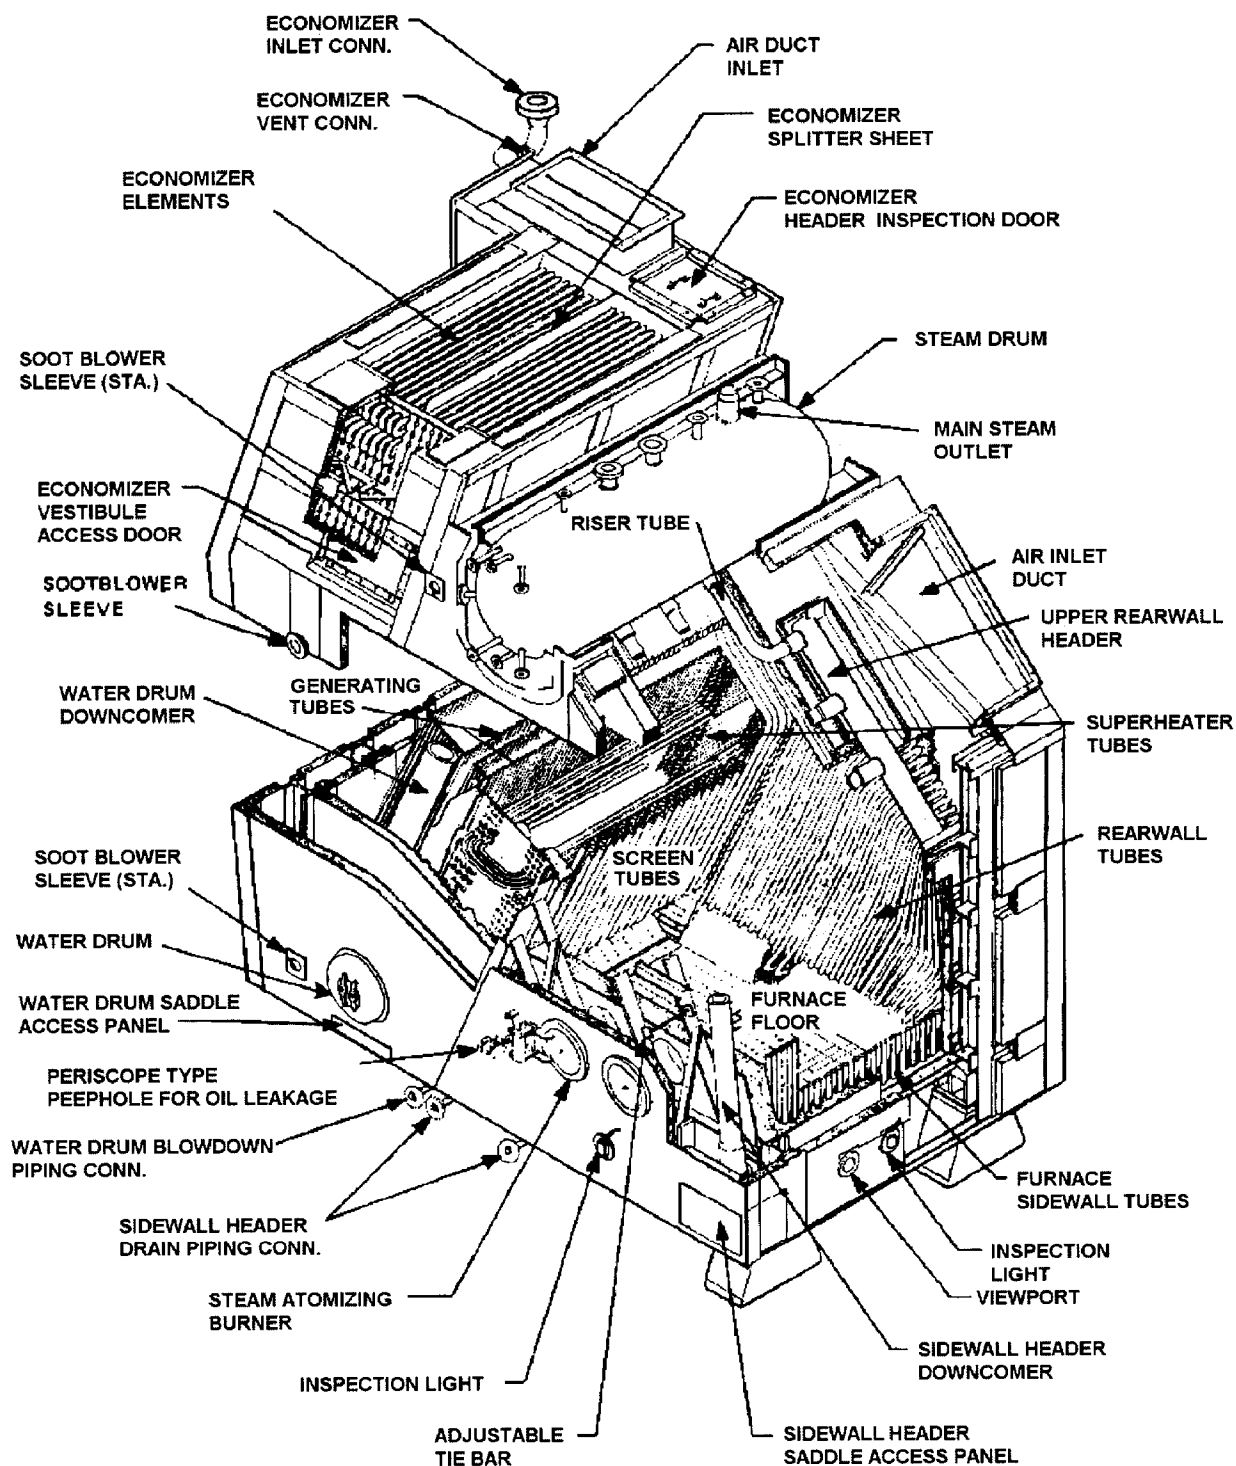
D-Type Boiler - Front Fired With Horizontal Superheater
